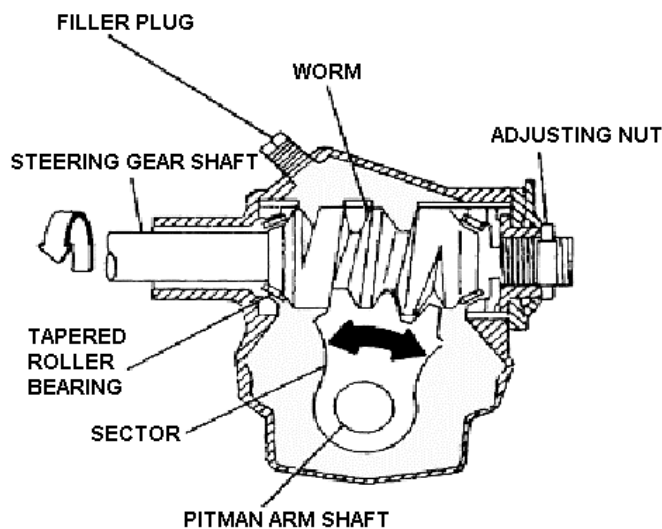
Exploded view of a worm-and-roller steering gear assembly (Toyota n.d.)
